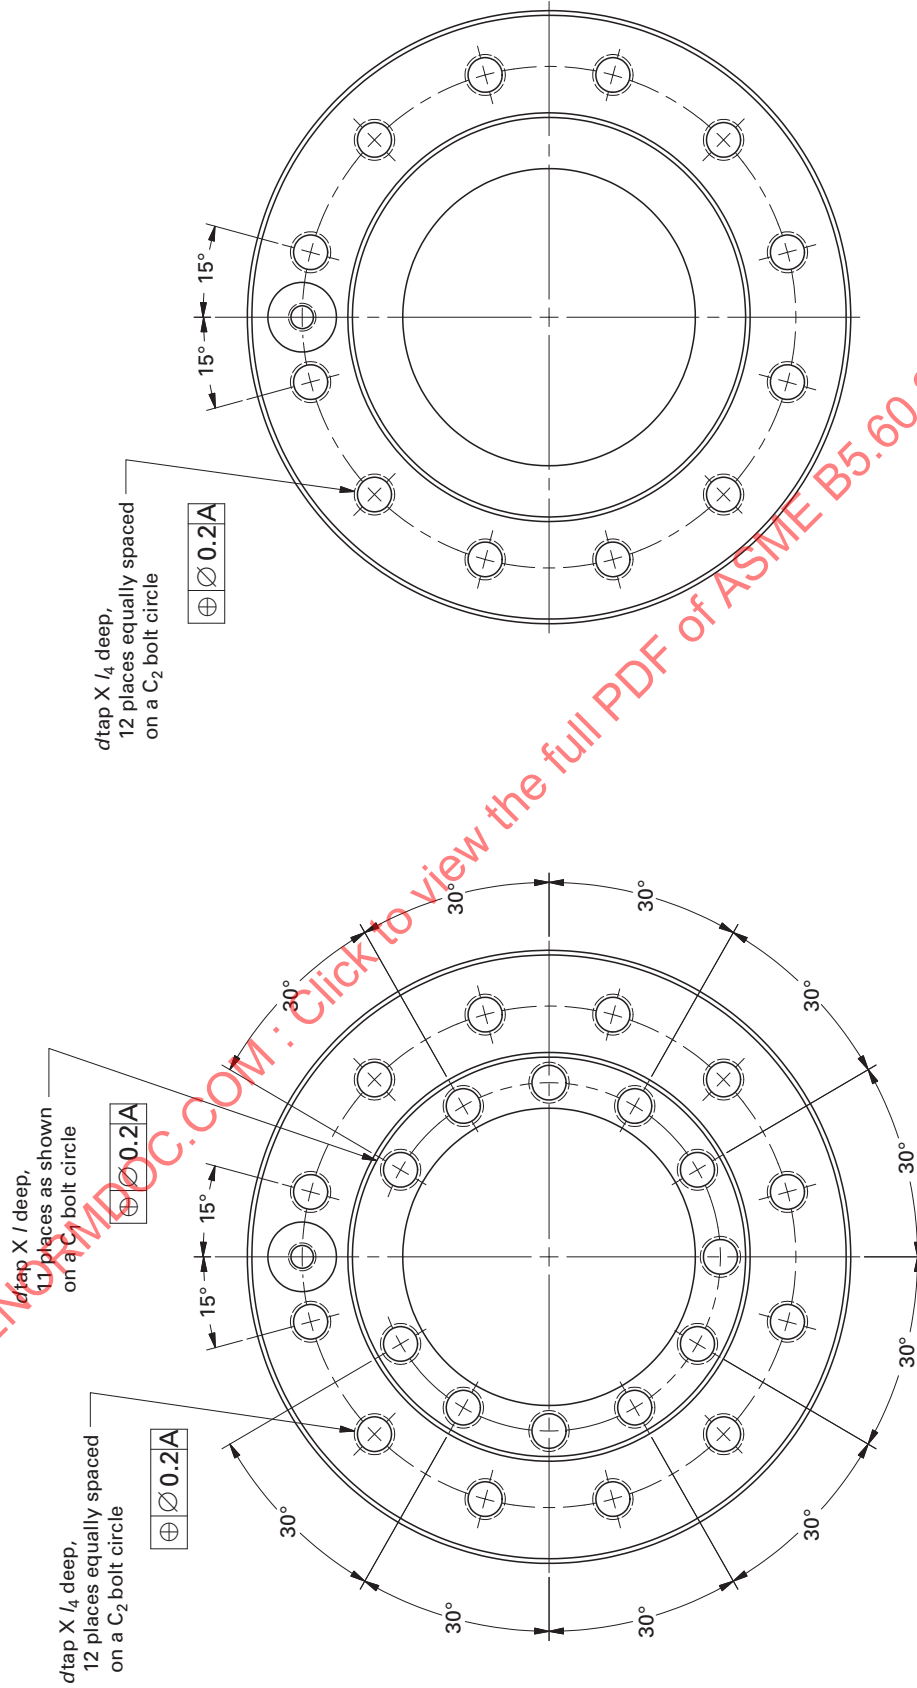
Type A Spindle Location of Holes and Drive Button for Sizes A-5 Through A-11
